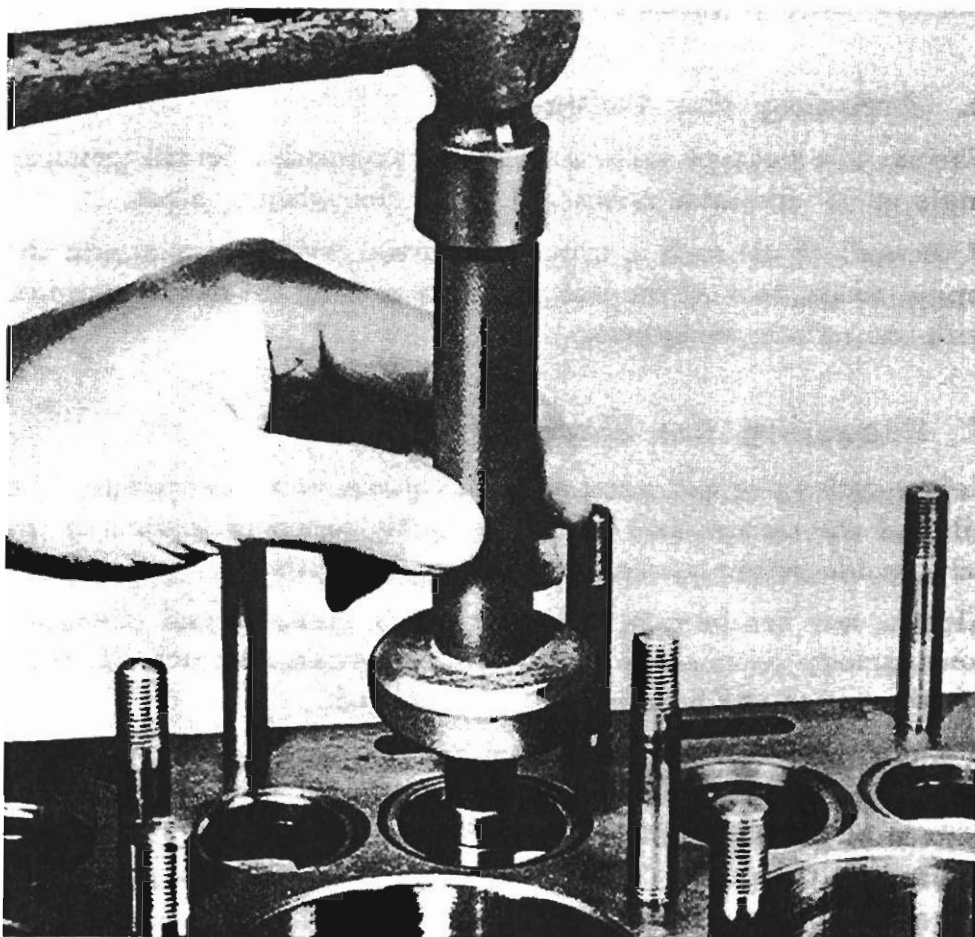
Both the Inlet and the Exhaust Valve Guides Can Be Driven to Their Proper Depth with the Tool Shown.
